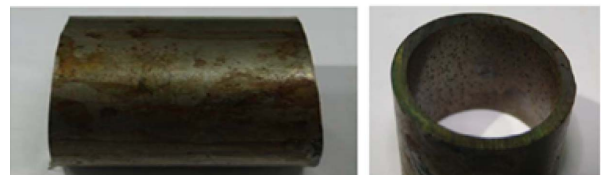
Corroded Surface of 800°C Heat Treated Super Duplex Stainless Steel Pilgering tube after Salt Spray Test (43 Hour).
